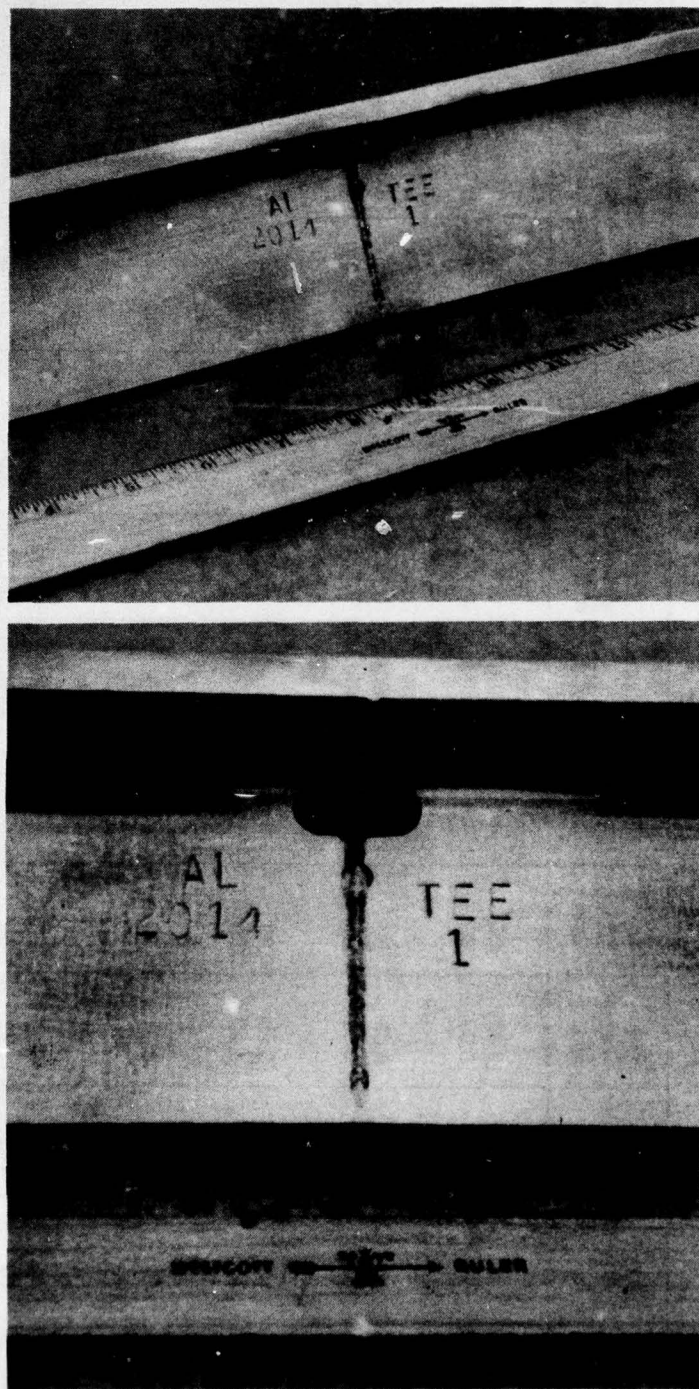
SSB Butt Weld Made on 0.300-inch-Thick 2014-T651 Aluminum Alloy Tee Shape
